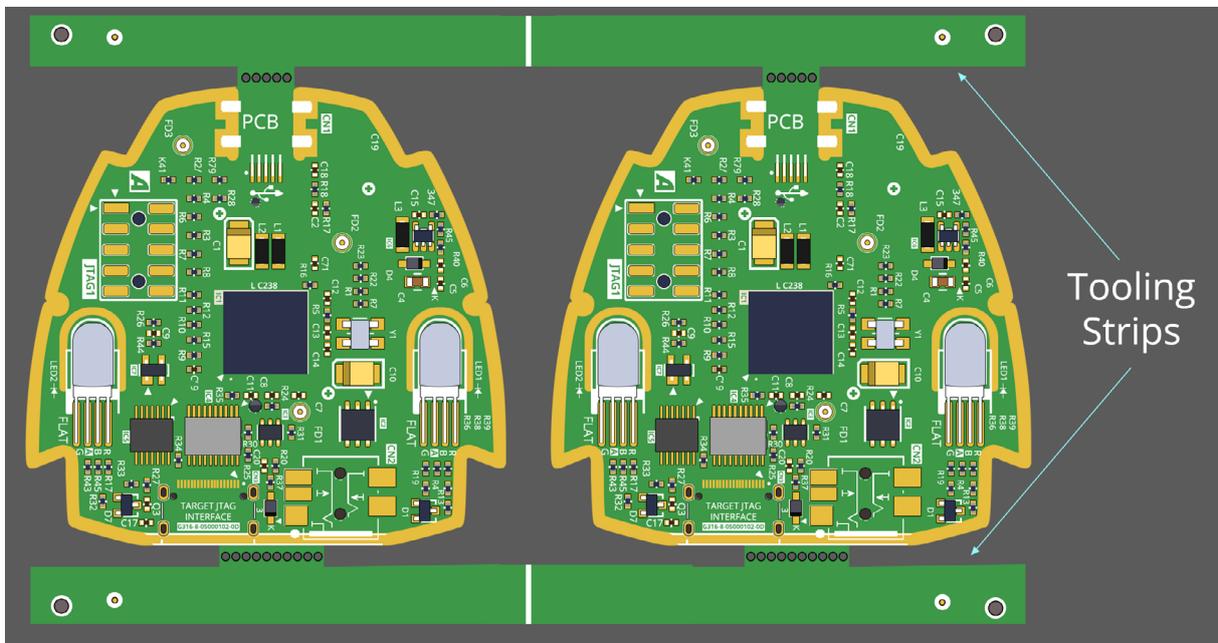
Tooling Strips Along the Top and Bottom Edges of a PCB
